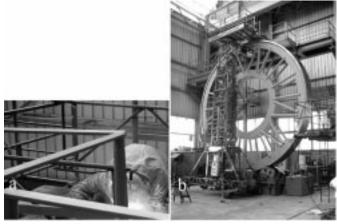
The shell of the prototype mandrel during (a) welding, (b) on the roll-type positioner.
